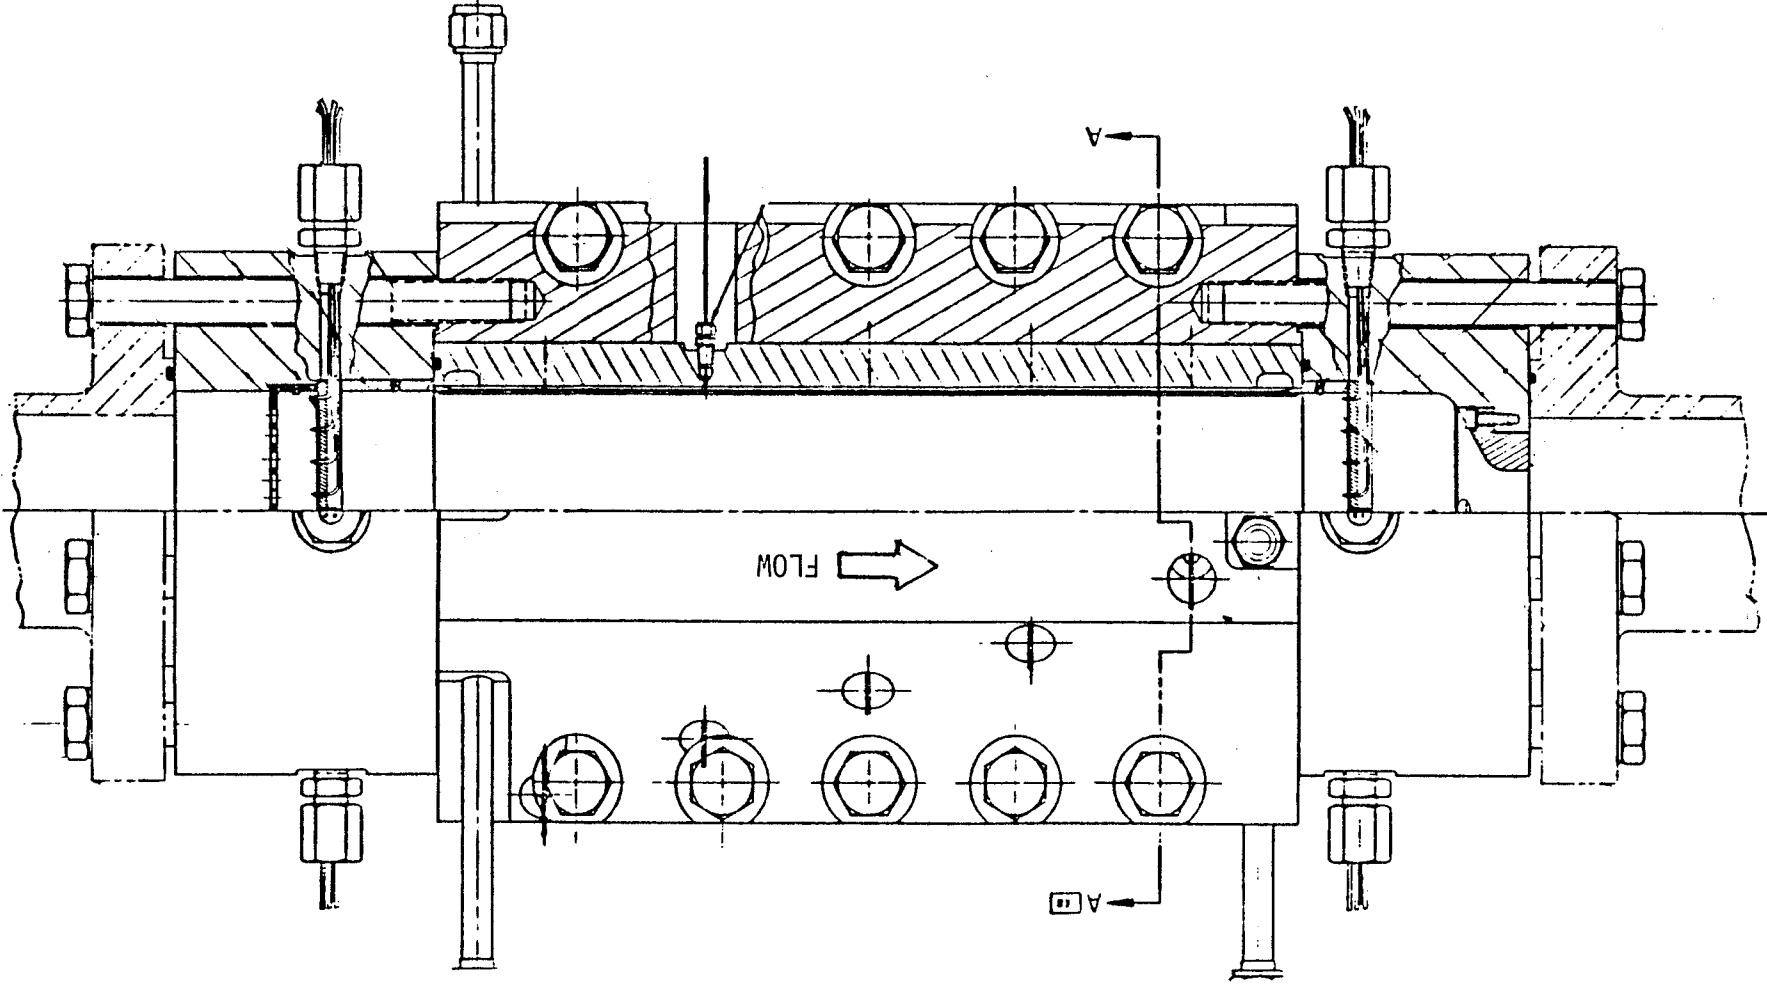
HOT AIR FLOW FIXTURE - CROSS SECTIONAL VIEW
